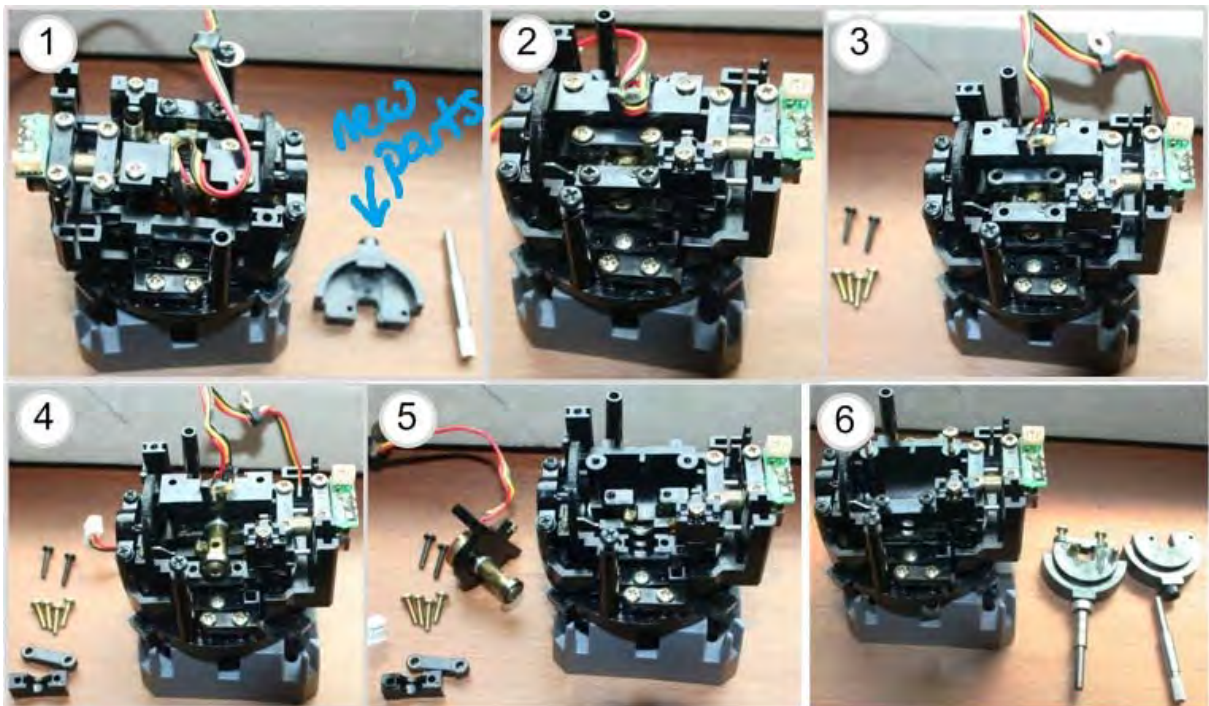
Disassemble the horizontal axis POT and joystick (new joystick parts in 1 & 6)
